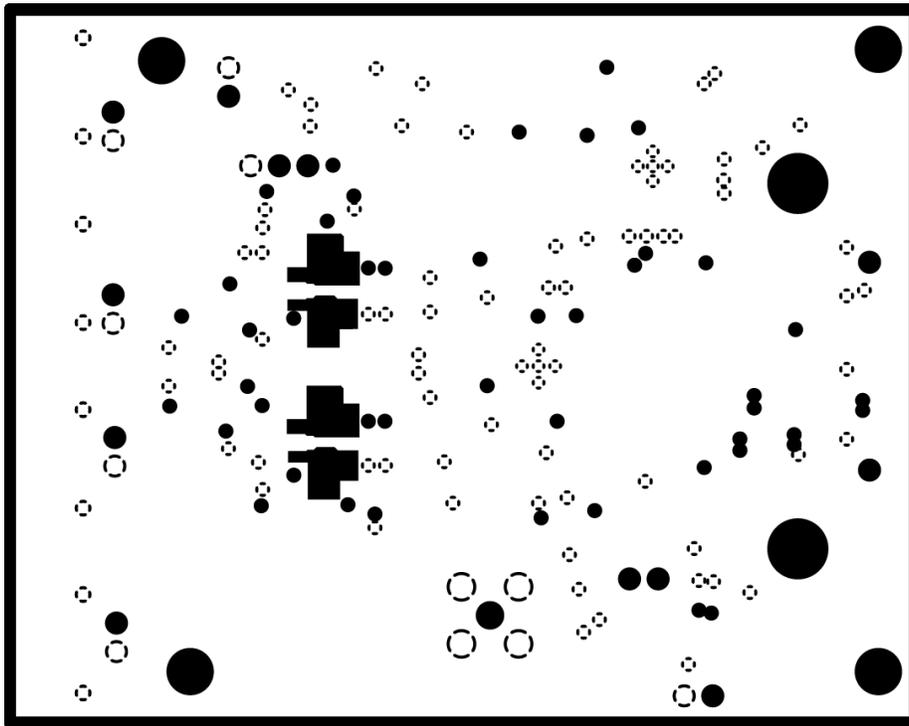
ADS9224REVM PCB Layer 2: GND Plane
